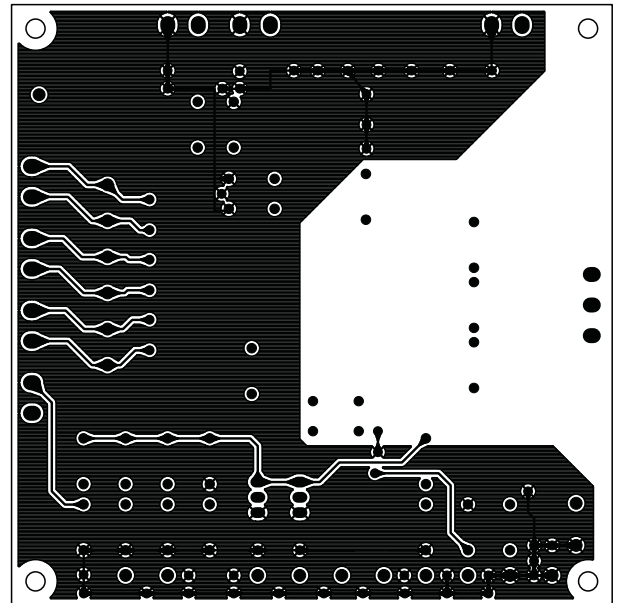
Bottom Layer, Copper Foil Pattern (Top View)
